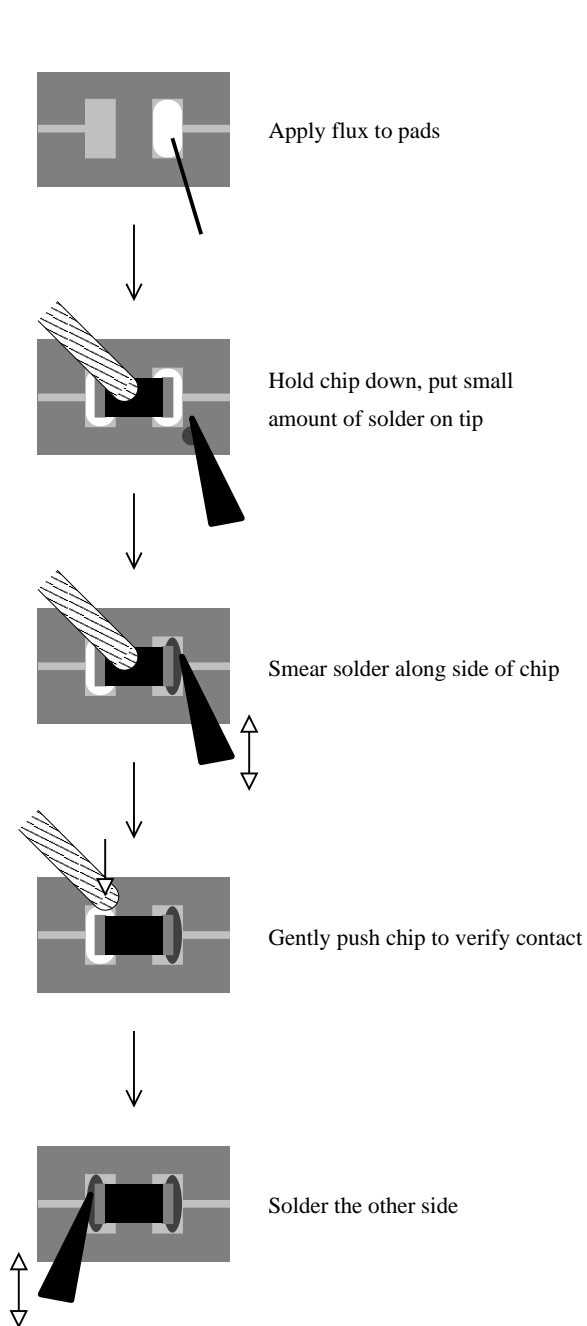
Components without pins (e.g., in 0603 or 0805 packages) are soldered by “painting” solder along the connecting surfaces.
